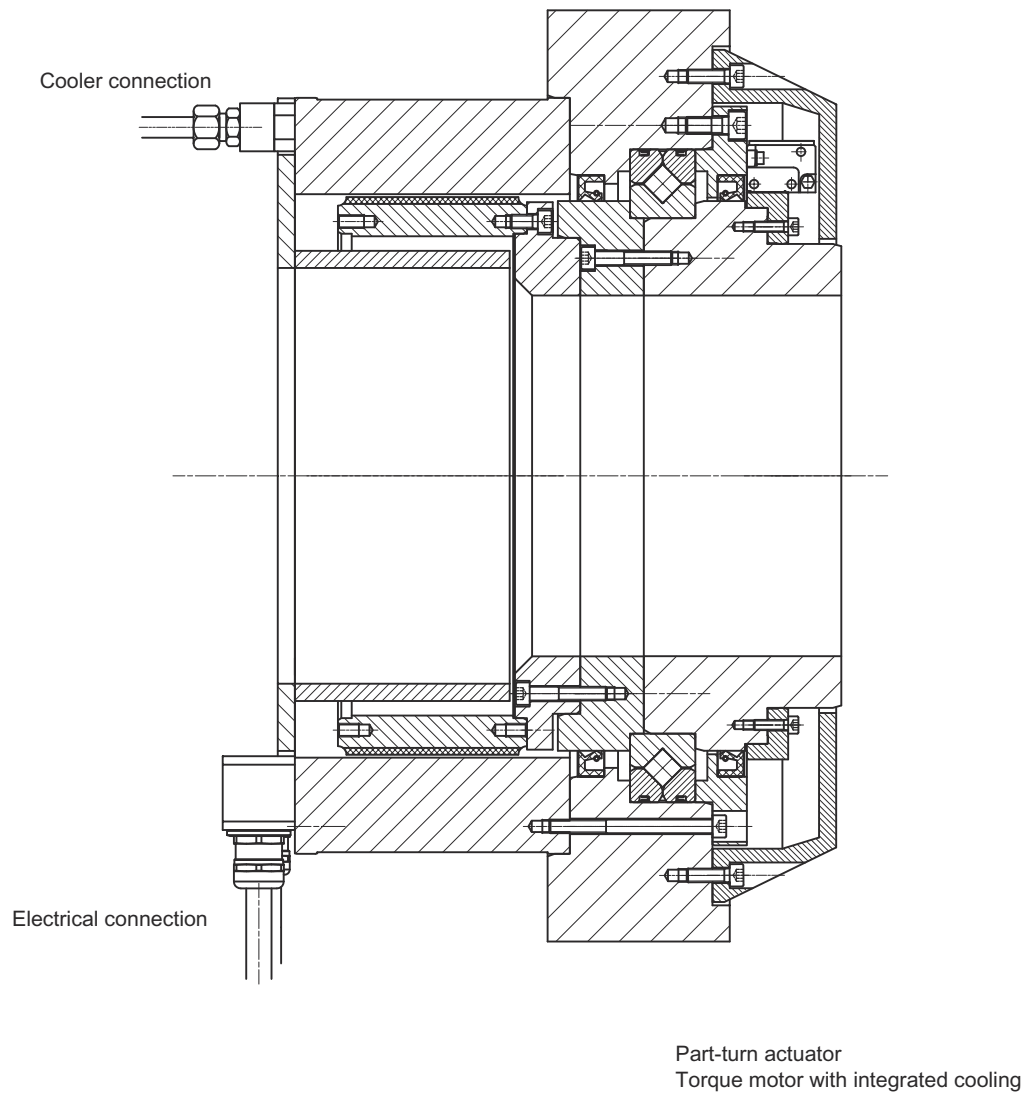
Part-turn actuator with torque motor with integrated cooling
